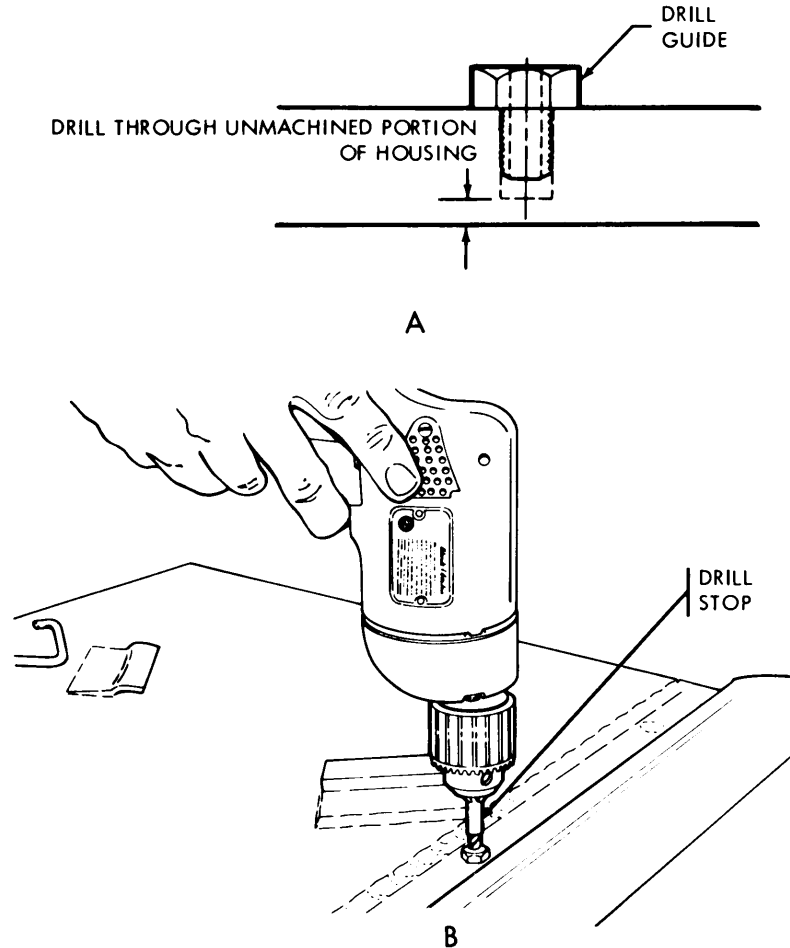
Top loading air cleaner access door bolt holes rework.
